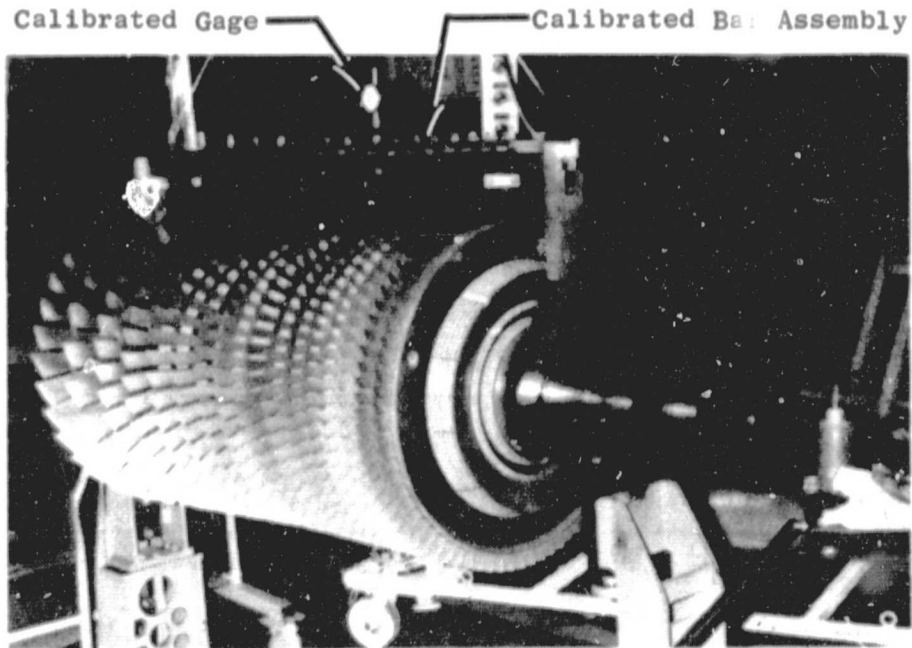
HP Compressor Rotor in Measuring Fixture.
